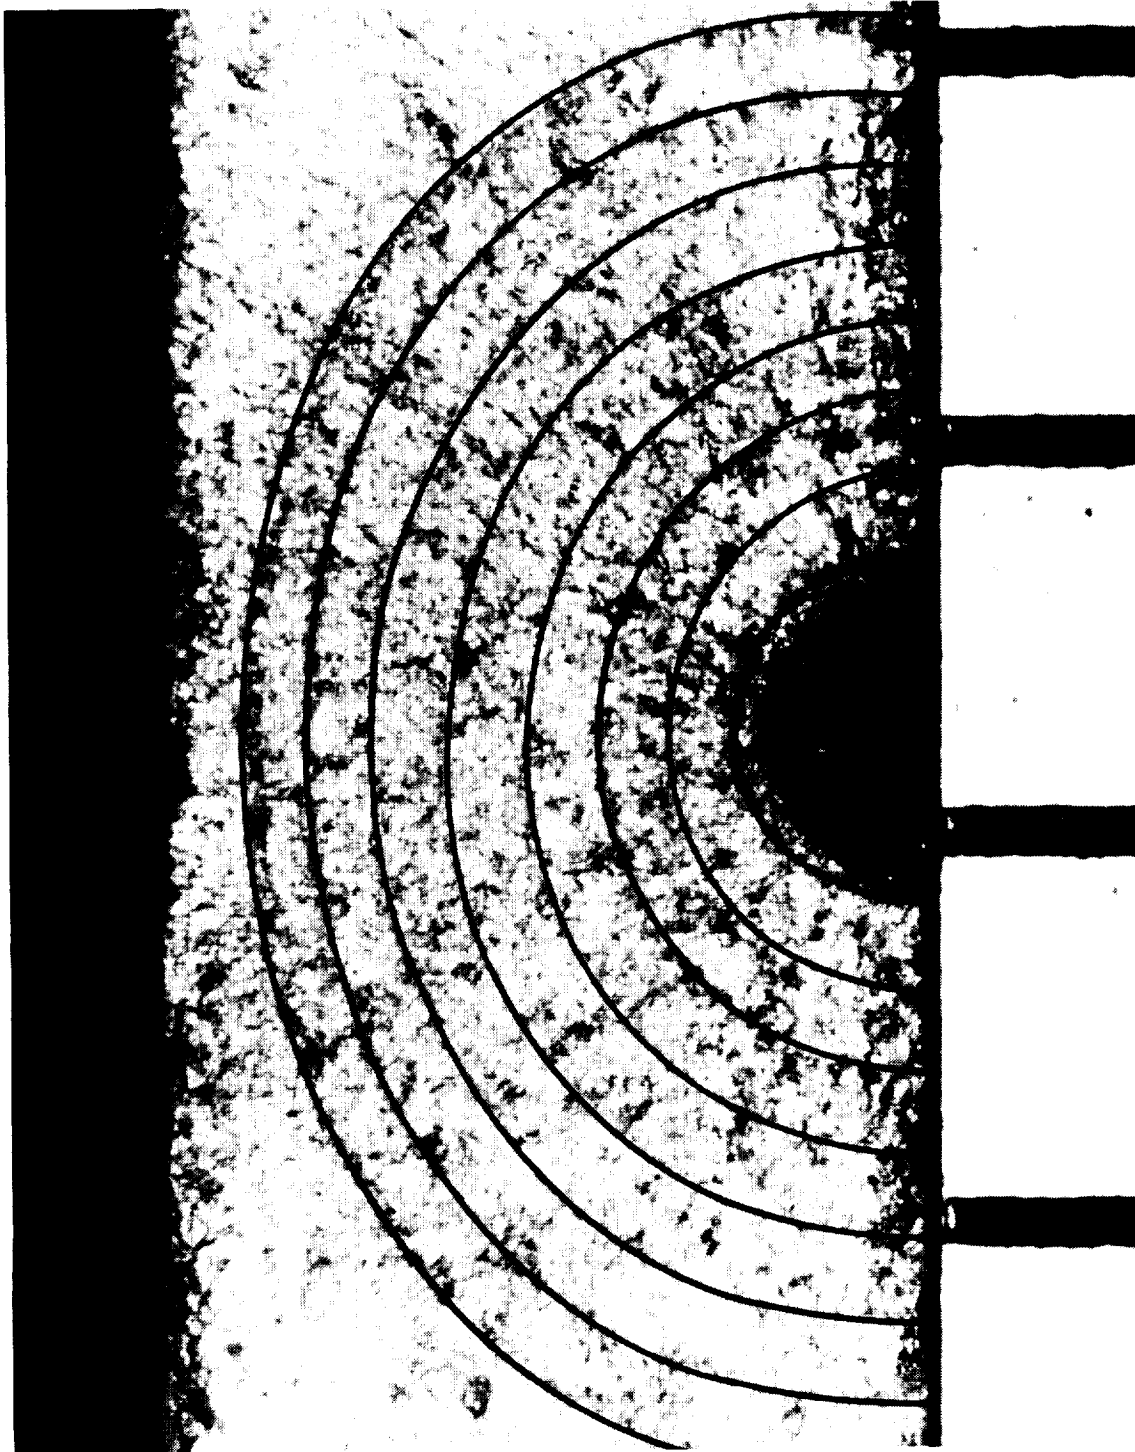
Enlarged fracture surface of part-through crack specimen.
